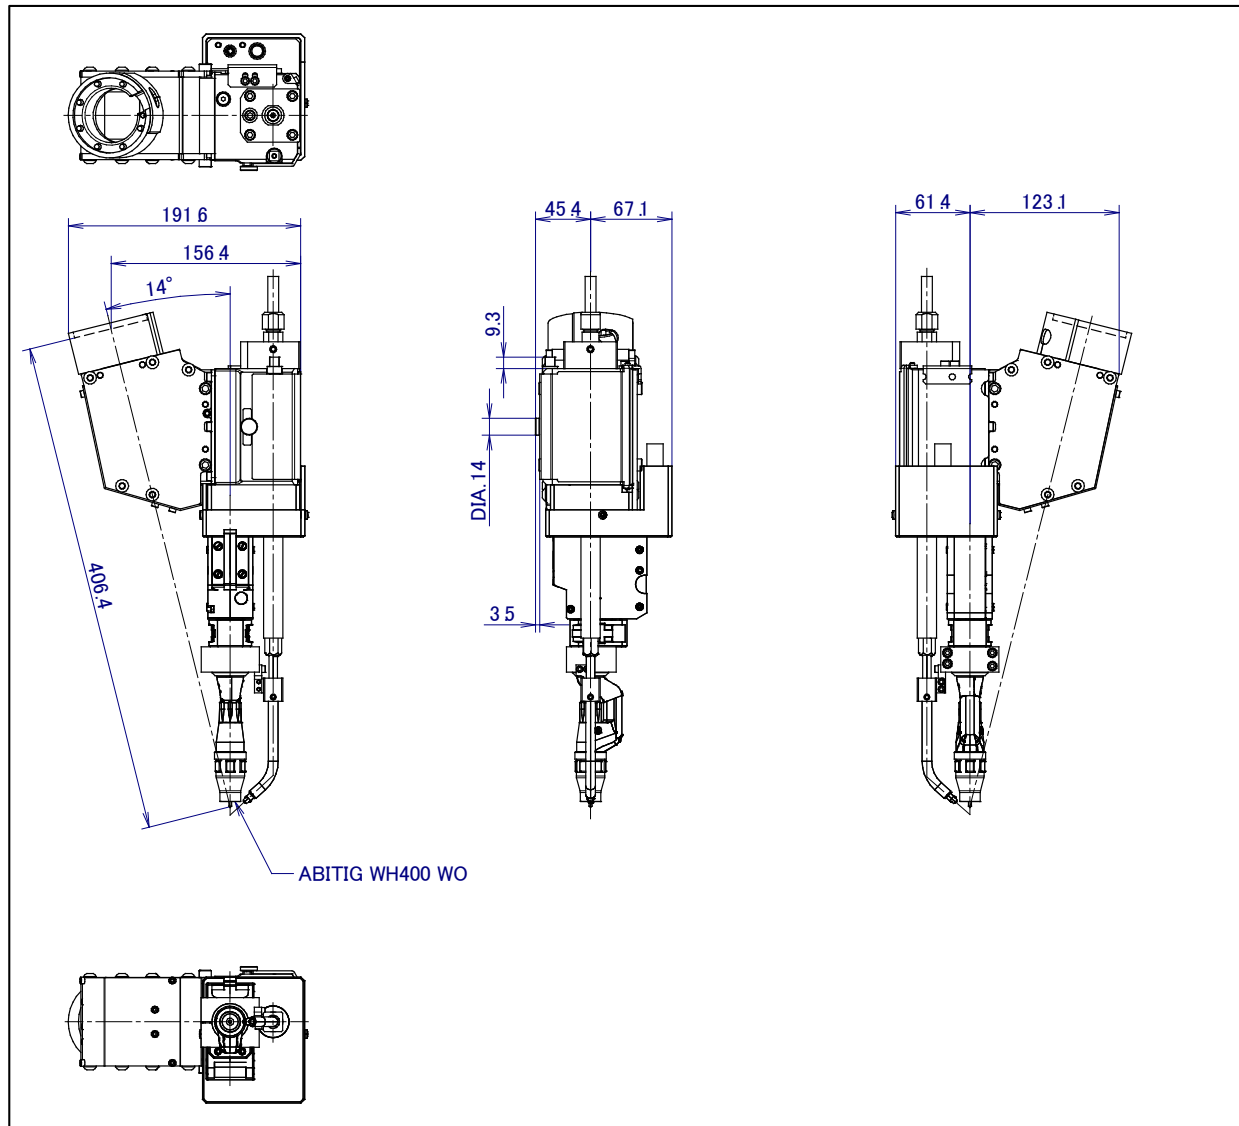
(c) External dimension (Servo torch for TIG)
